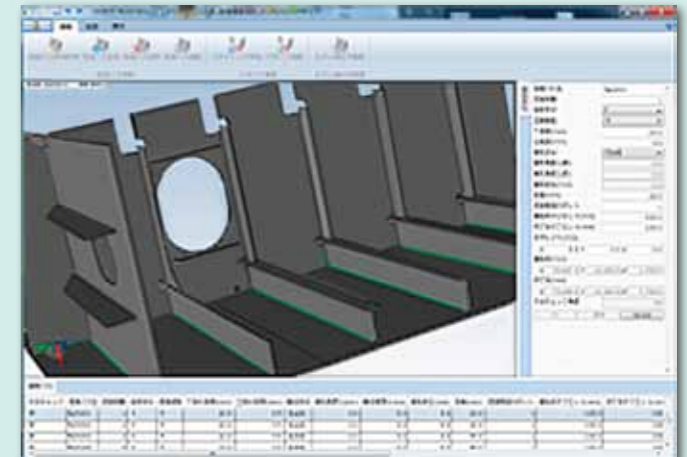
The software interface showing a selected welding line and the shape of an enclosed space
